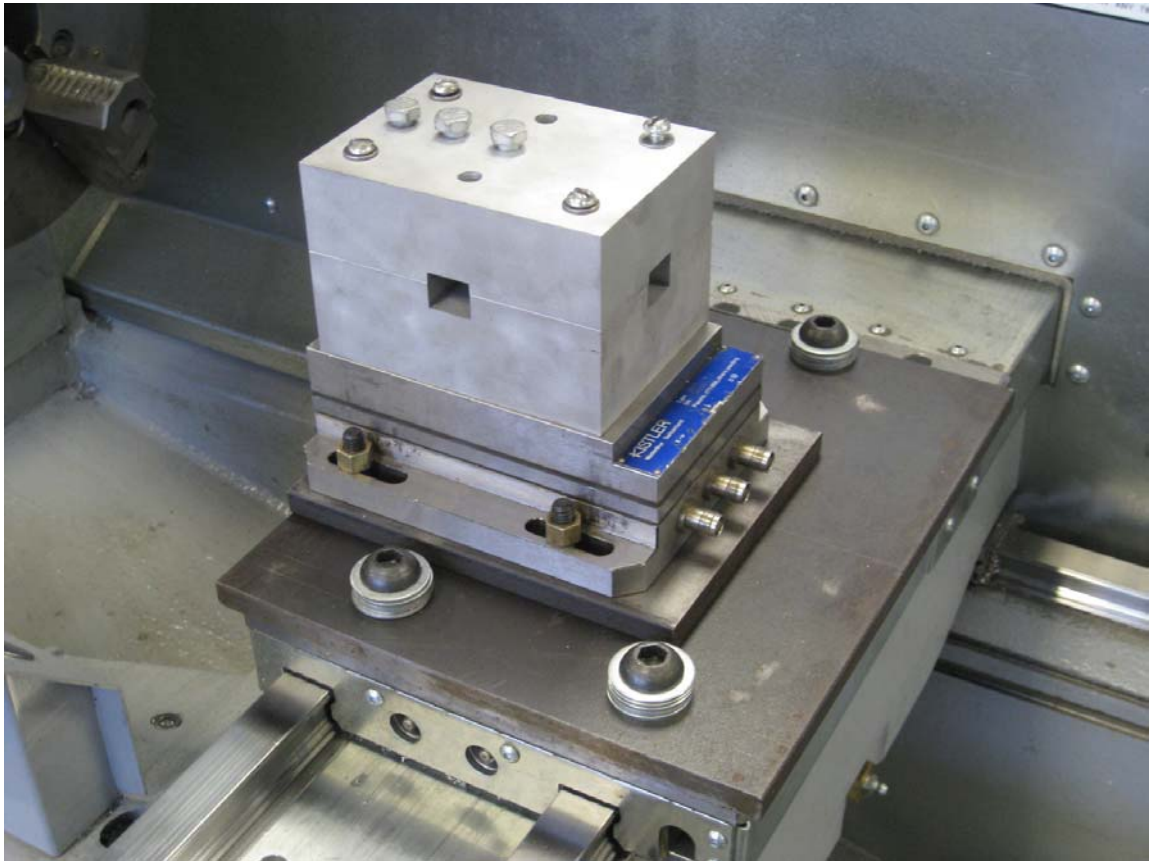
Dynamometer and Tool Holder Mounting Assembly
